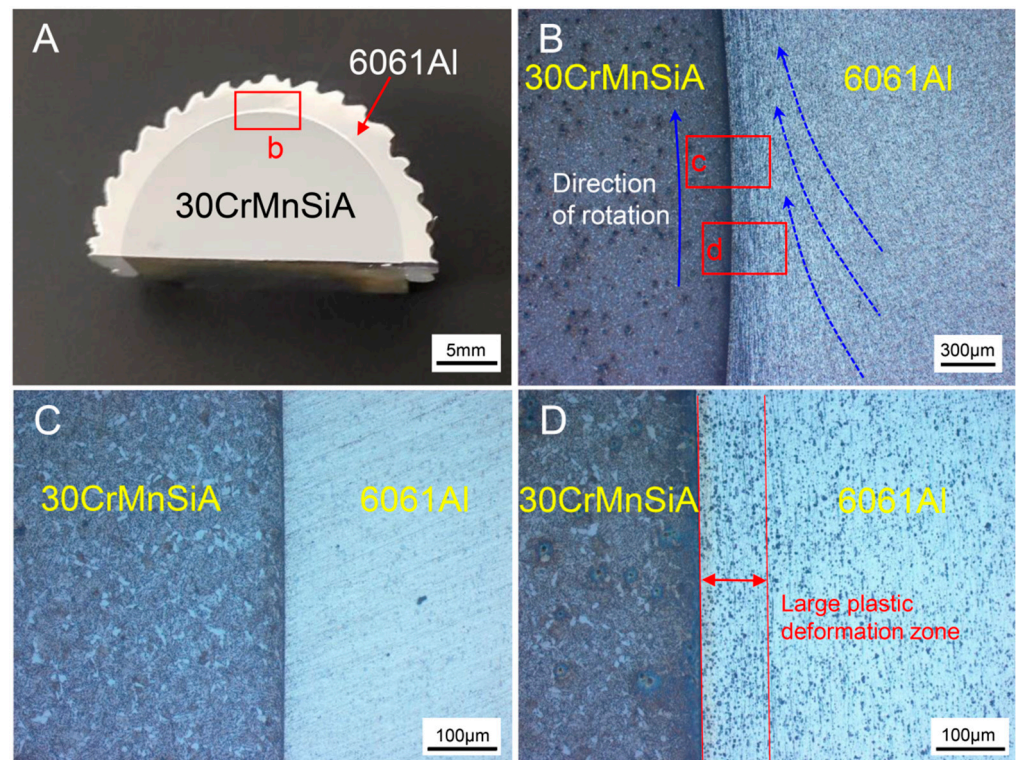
Cross-sectional microstructure of the aluminum/steel joint: (A) Joint appearance; (B) Larger view of (A); (C) Larger view of (c in (B)); (D) Larger view of (d in (B)).
